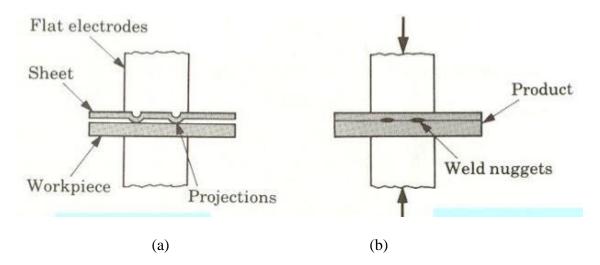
Principle of Projection welding (a) prior to application of current and pressure and (b) after formation of welds
